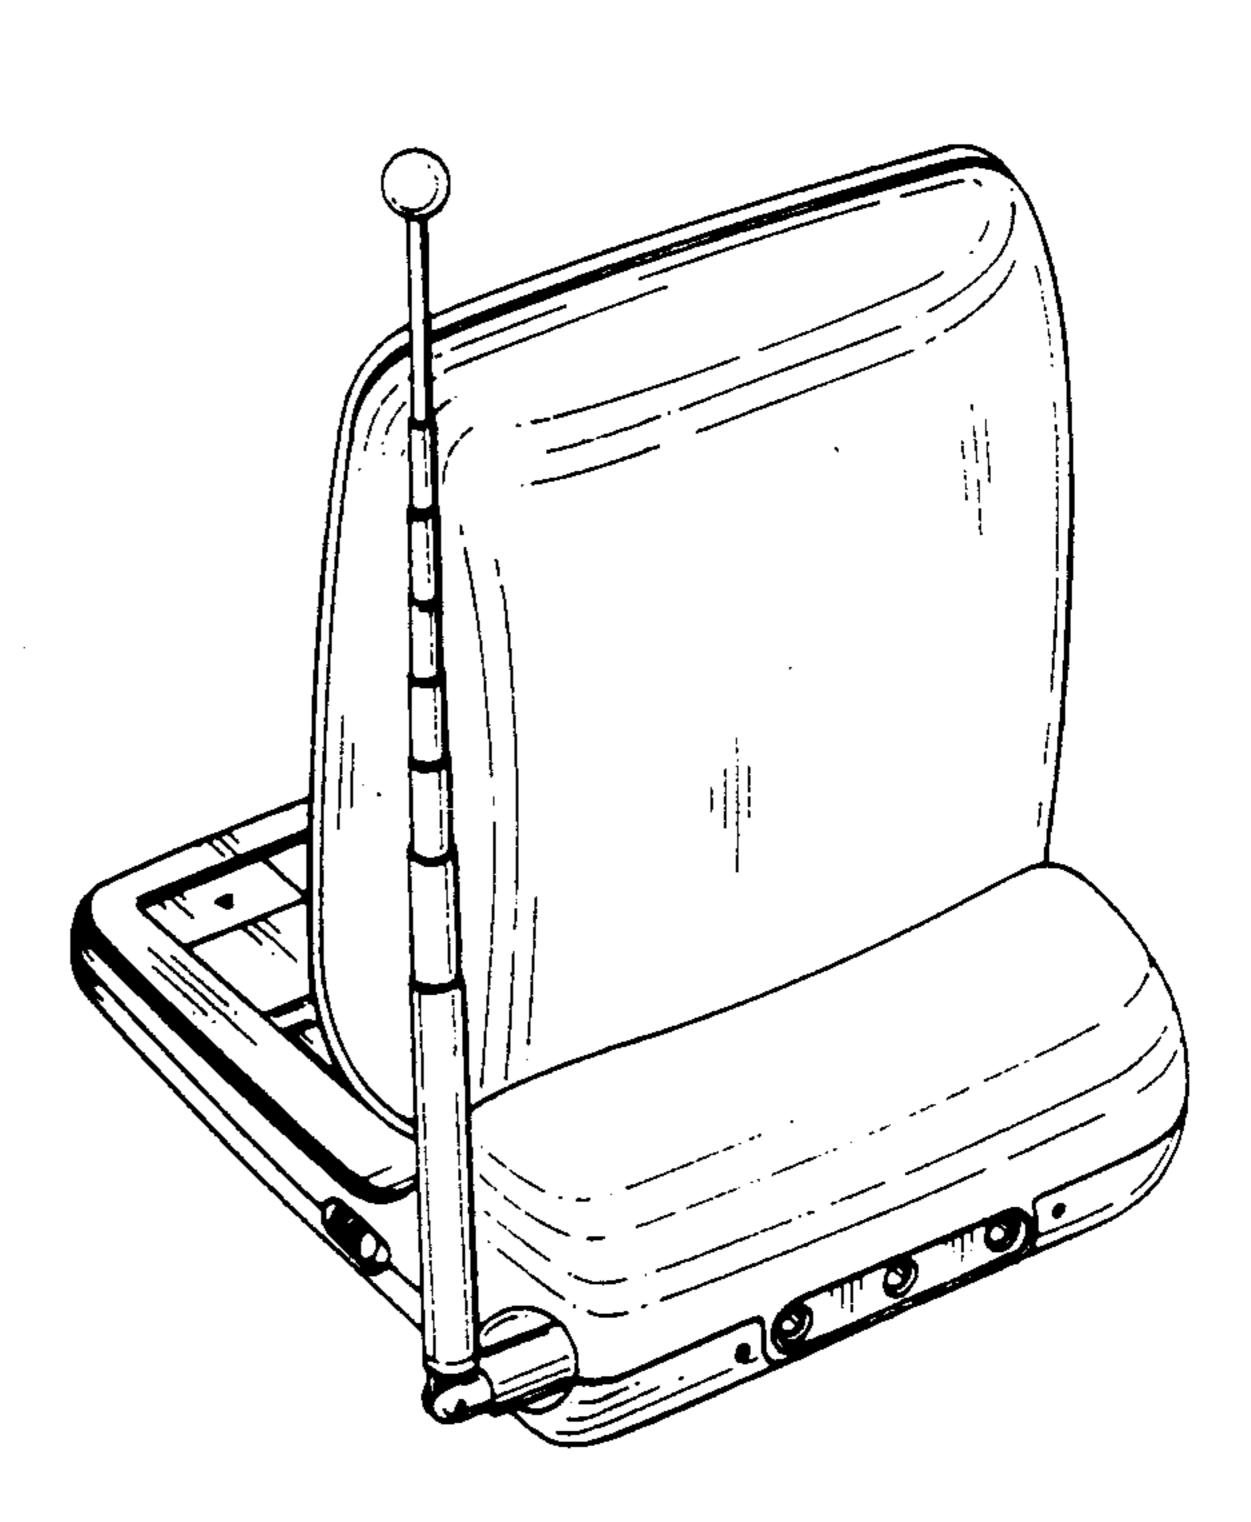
is a top and right side perspective view thereof, shown in a folded condition;
